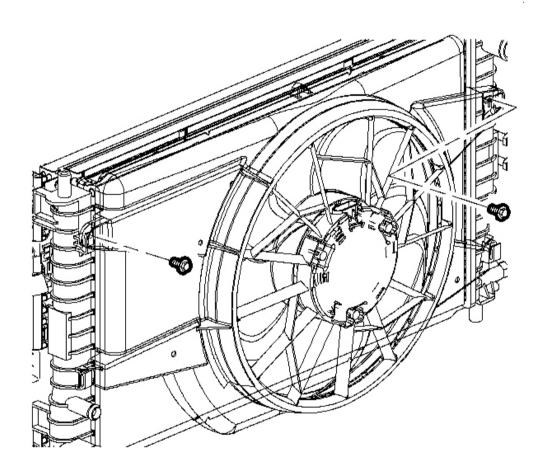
View Of Fan Assembly Bolts From The Radiator Courtesy of GENERAL MOTORS CORP.
